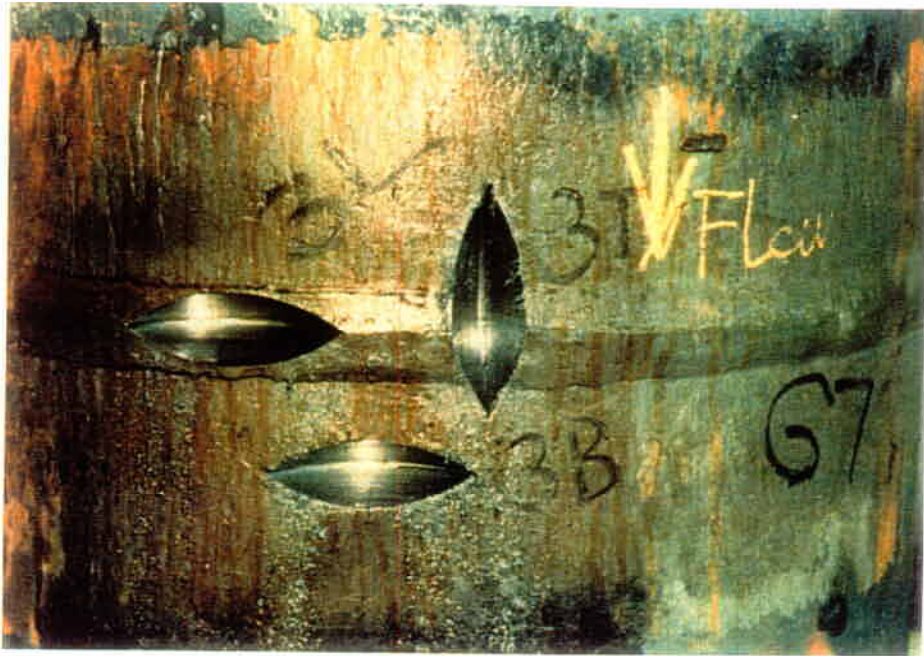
Locations where samples were removed from a girth weld for creep testing.
